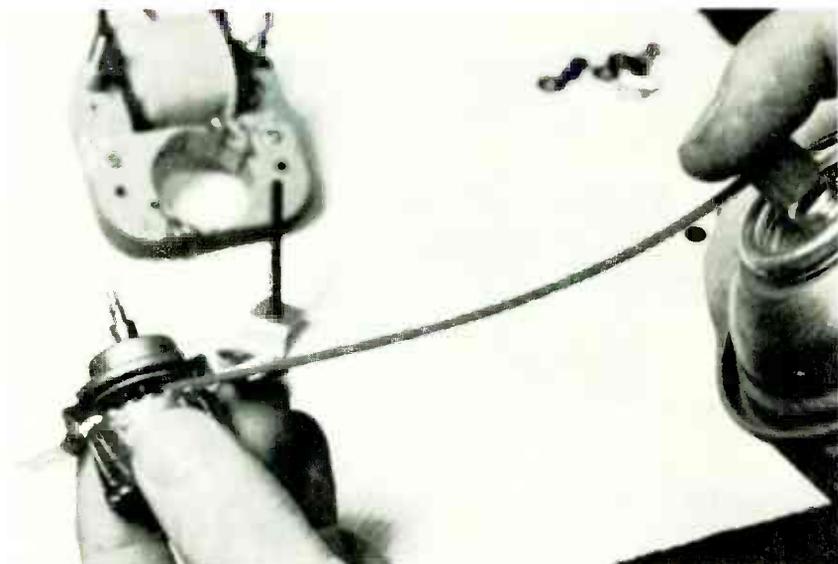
As a matter of general policy, if the changer is very old and there is a large buildup of lint and dirt, you should remove the motor from the changer and disassemble the rotor and bearings to give the bearings a thorough cleaning. Even if applying oil to the assembled motor appears to help fix the motor speed, you can be sure the fix is strictly temporary unless you clean the bearings thoroughly. The tuner cleaner makes this an easy job. It isn't necessary to completely remove the bearing to do the cleaning job. As shown here, the upper bearing was held captive by the four-step driving pulley but could be slid up and down the shaft enough to do the job. Notice the small parts carefully laid out on a clean paper towel so they will easily be found when it comes time to reassemble the motor.
